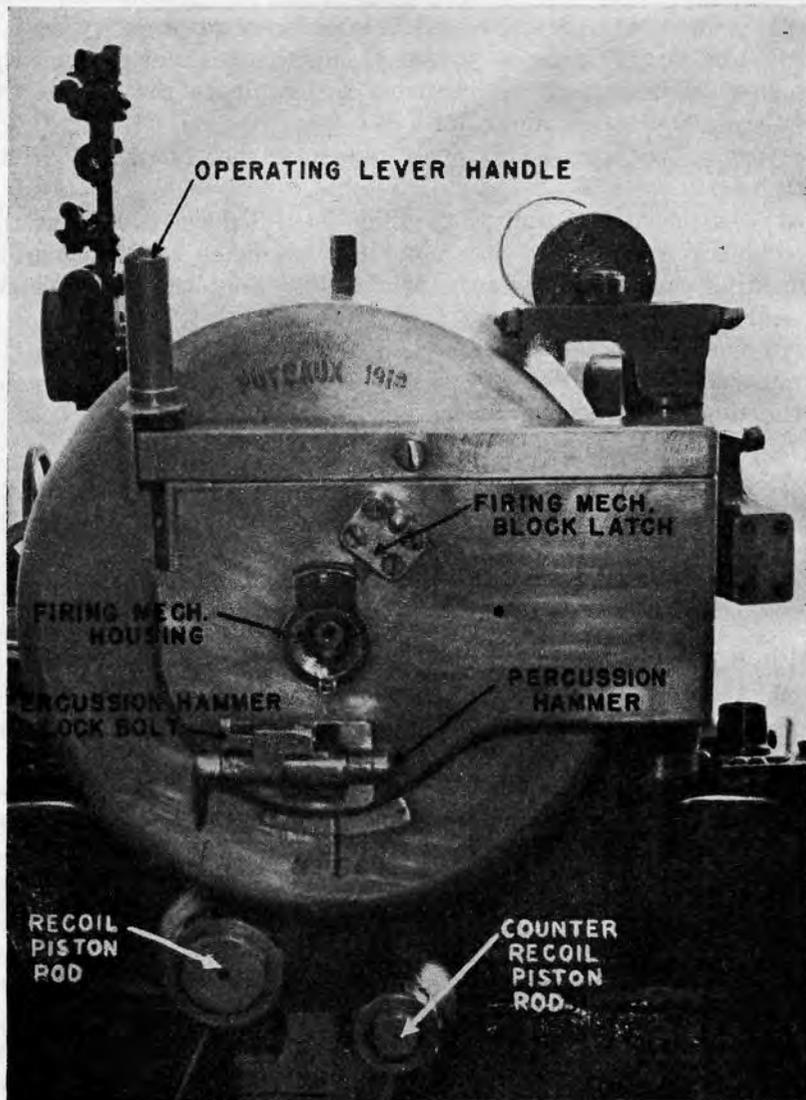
155-mm breechblock showing firing mechanism housing.
